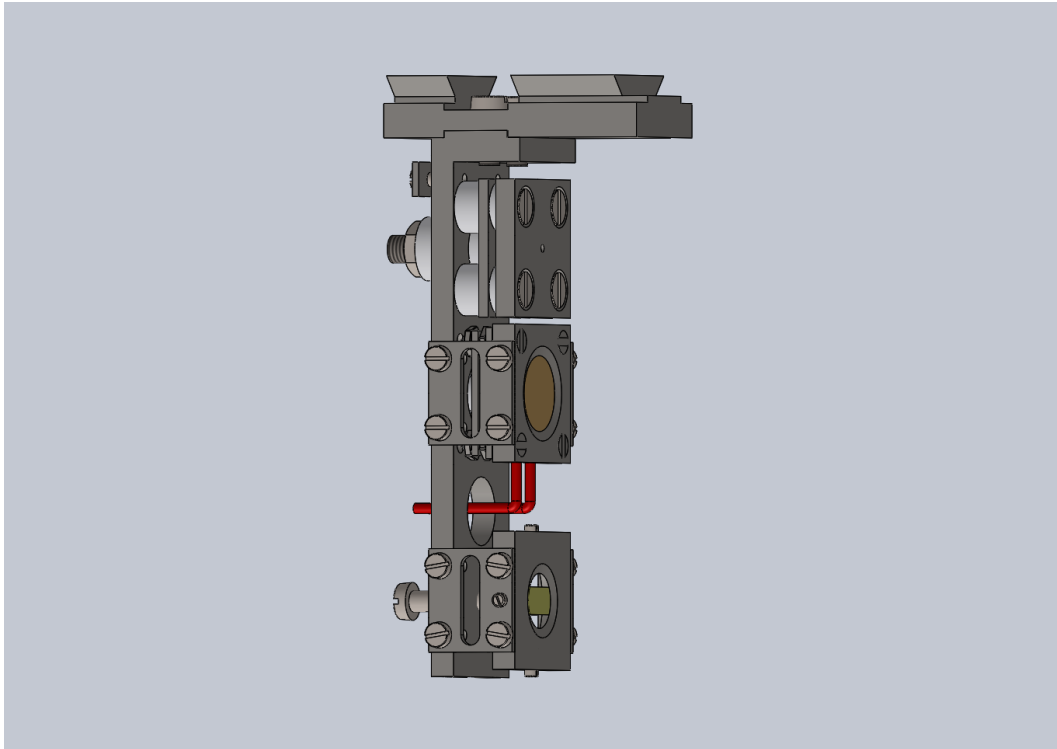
3D visualisation of the new target holder design, with the clamping for bulk samples in the lower part. Such a sample is illustrated, only being hold in place via pressing from the screw in the back. The setscrews should be removed after installation of the stone, as they are not covered by the sample, which could lead to their irradiation.
